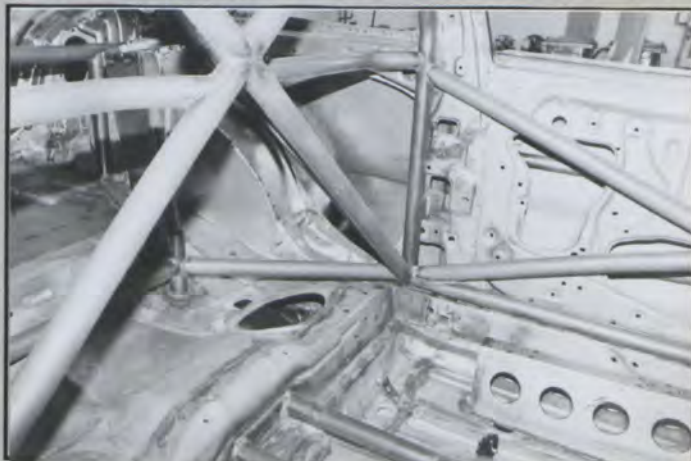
REAR FLOOR SECTION (RIGHT)
